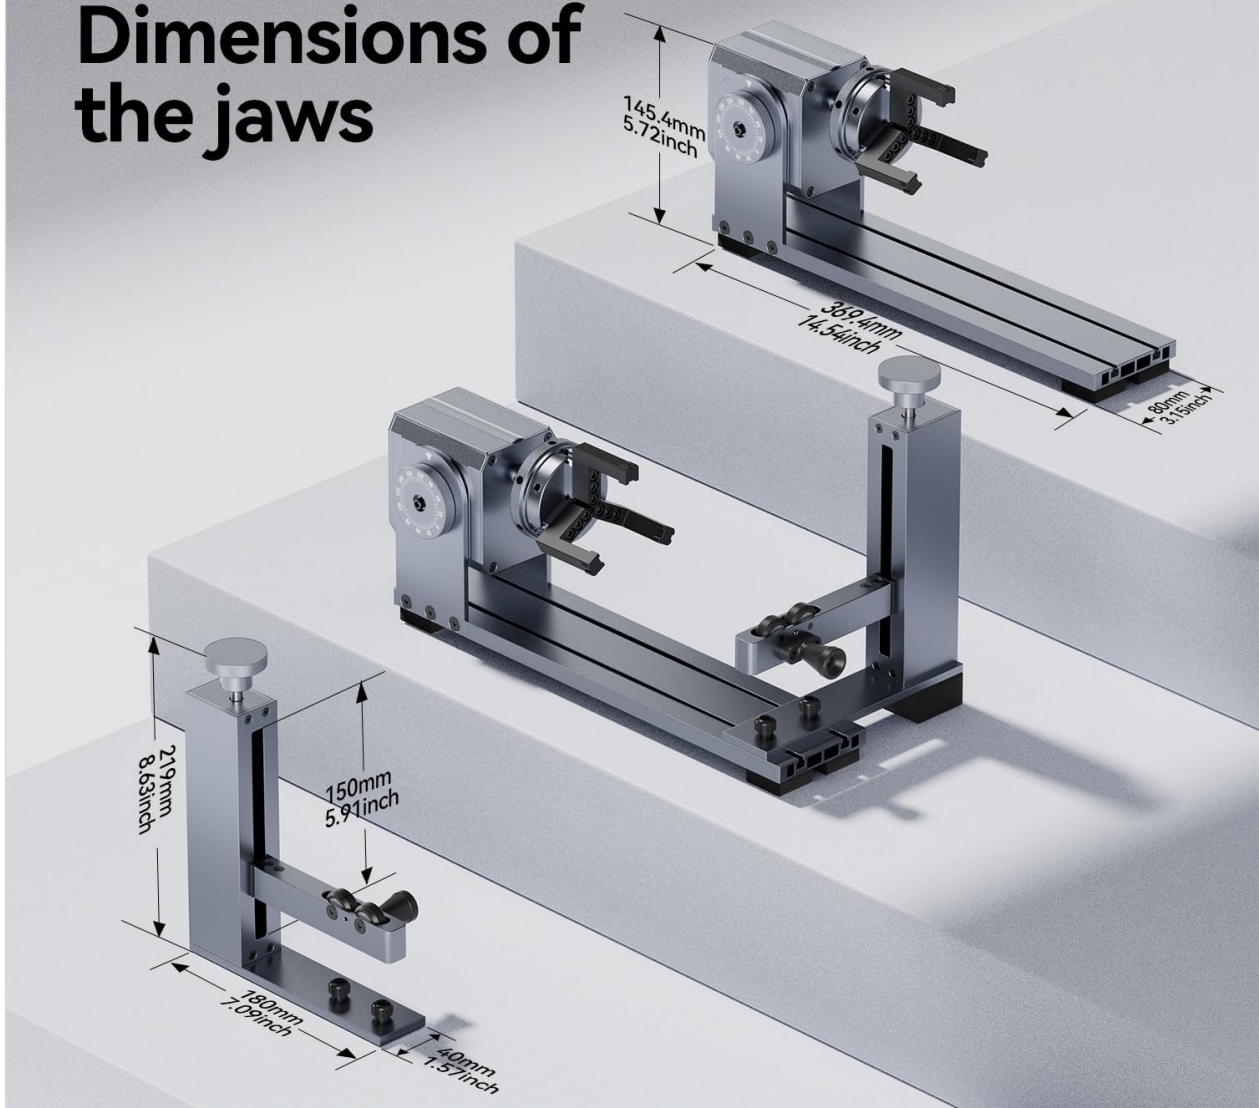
Detailed dimensions of the 4-in-1 chuck jaw kit, illustrating its adjustable components for securing various cylindrical and irregular objects for engraving.
